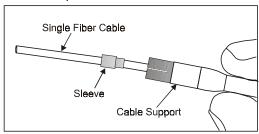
Cable Support and Sleeve on Single Fiber Cable
